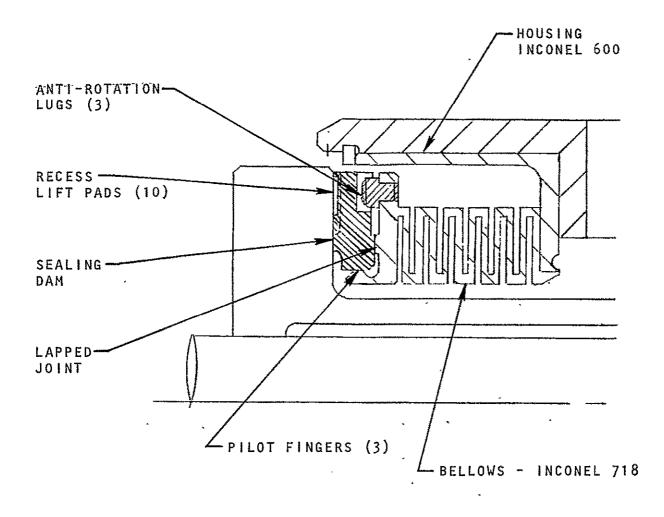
NASA-Provided Bellows LOX Seal Design Layout
